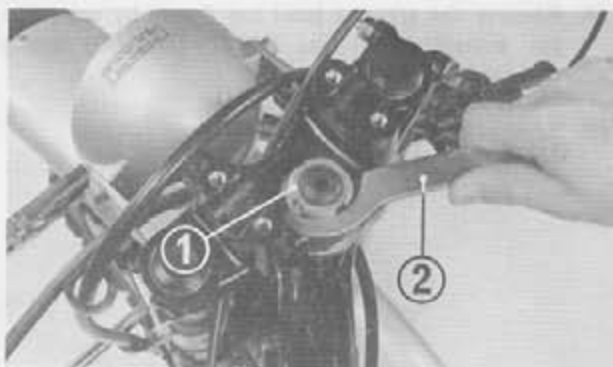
(1) Steering stem nut (2) 46 mm pin wrench
